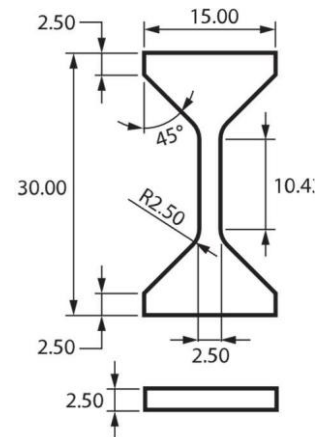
Dimensions of the dog-bone shaped specimens used in this study in mm
